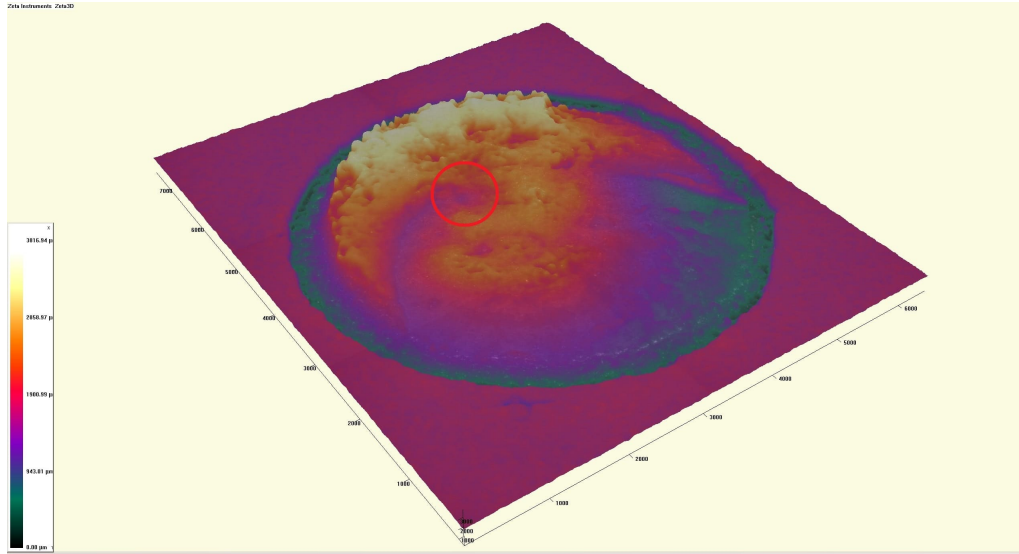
Pore zone selection from fracture surface of a 99.5% porosity, 150°C specimen.
